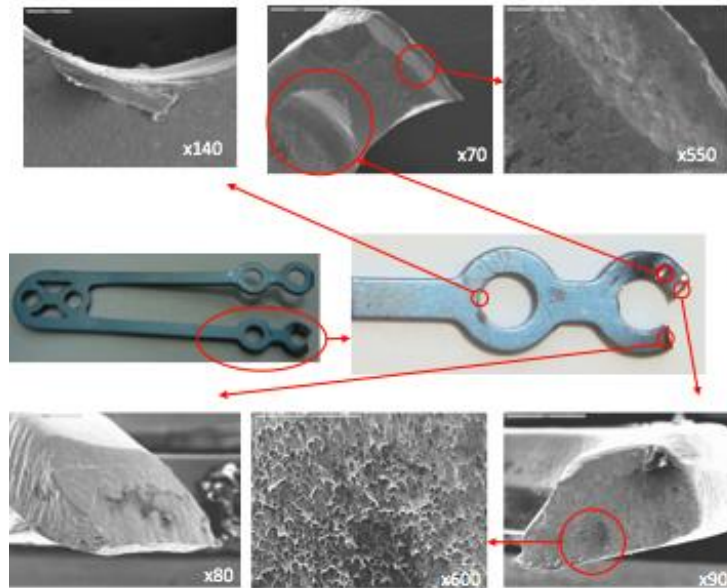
Image of plate fractured surfaces; damage to surface having contact with patient
